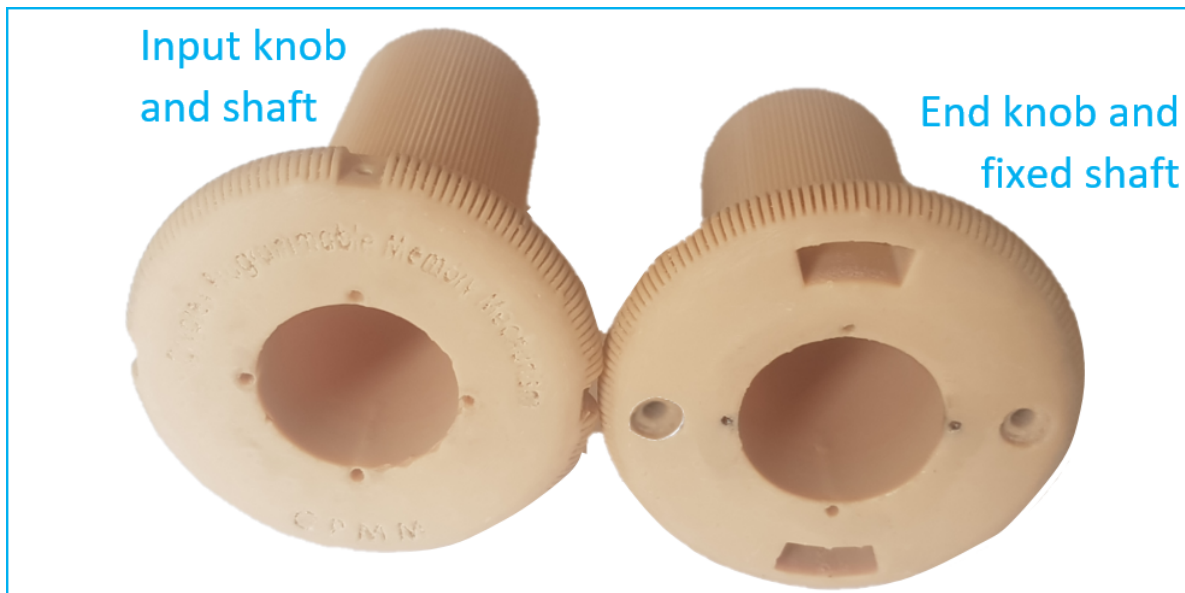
Picture of the input knob-shaft and the end knob and fixed shaft from the 3D printed prototype.
